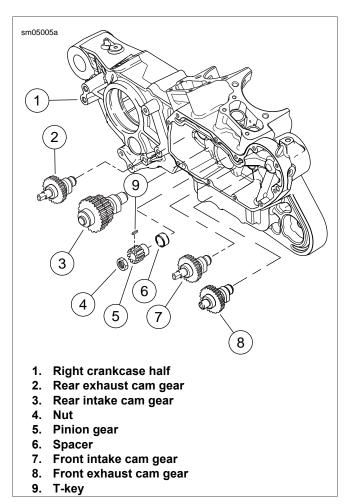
Gearcase and Valve Train Components: XR 1200X
